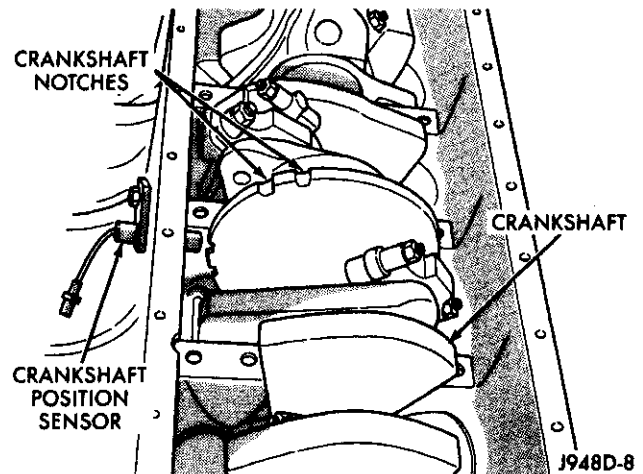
Crankshaft Position Sensor Operation—8.0L V-10 Engine
